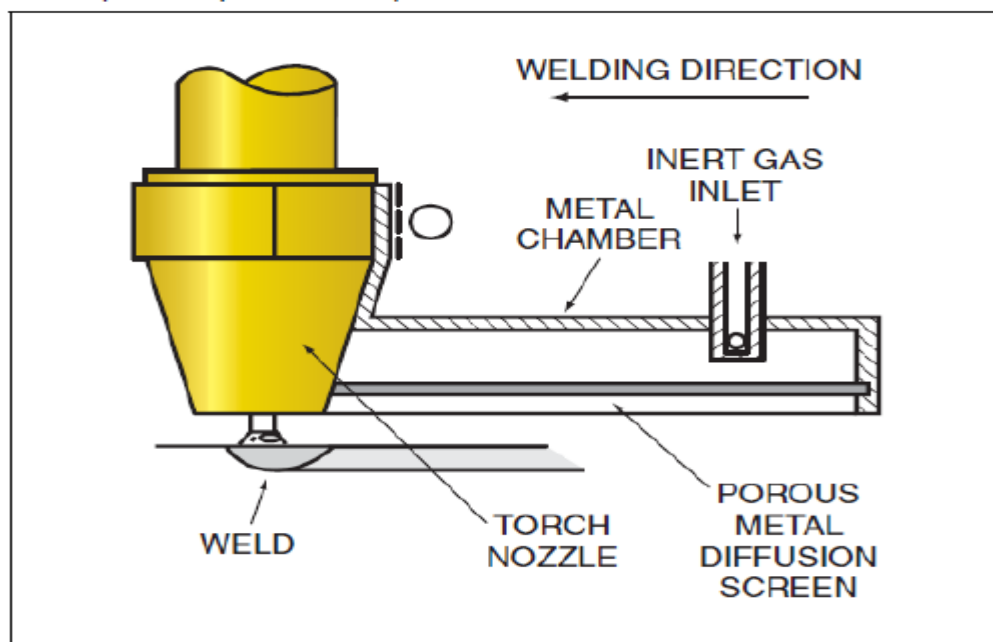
Trailing shield attached to torch for gas shield arc welding of titanium and other reactive metals<sup>(18)</sup>
